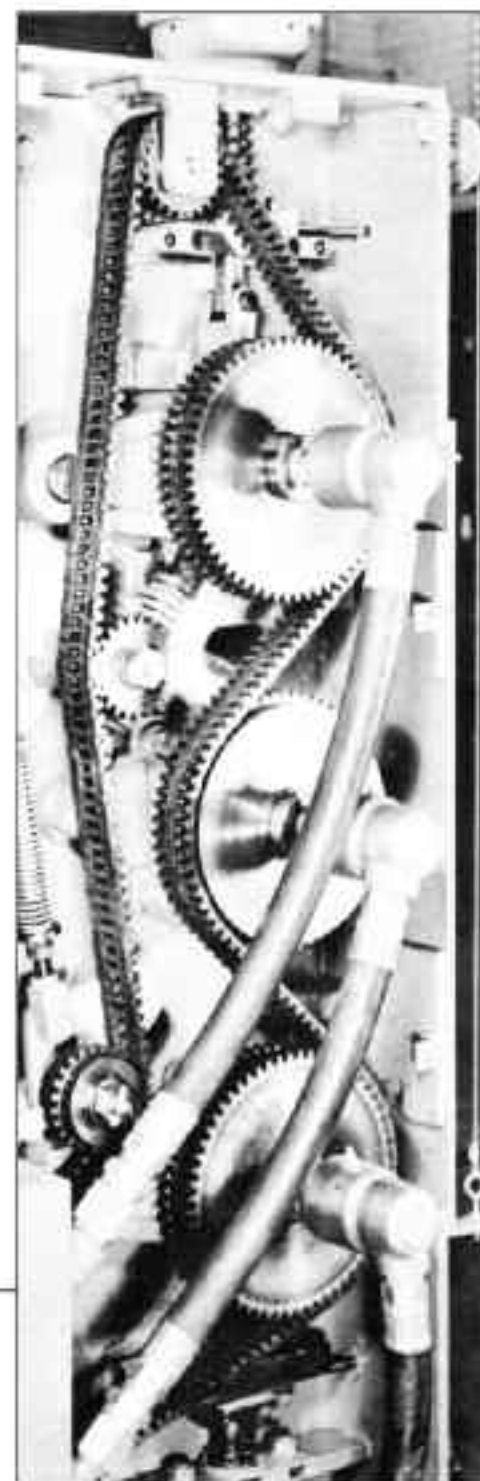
Typical serpentine drive with sprockets on both sides of the silent chain.
